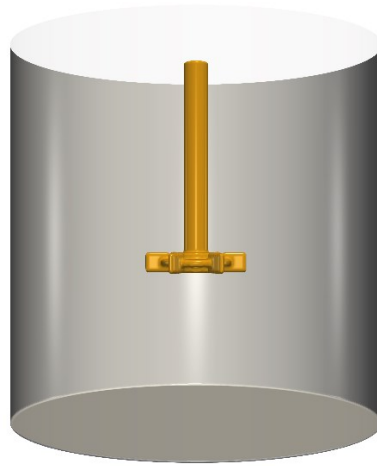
Numerical construction of all parts of the mixing system. In this case, the mixing vessel is equipped with a RT impeller.
